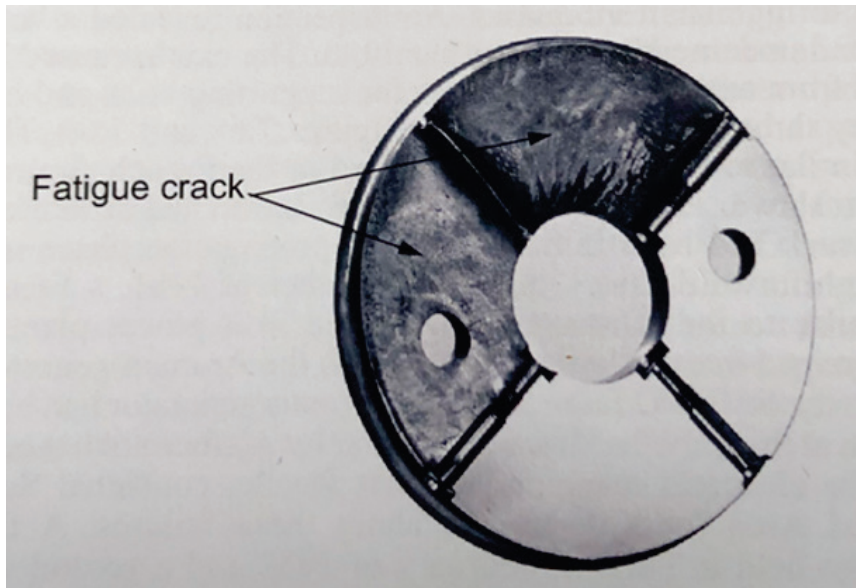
Crack in rotor shaft initiated by Fretting Fatigue which then changed to turning frequent growth (Olkiluoto)
